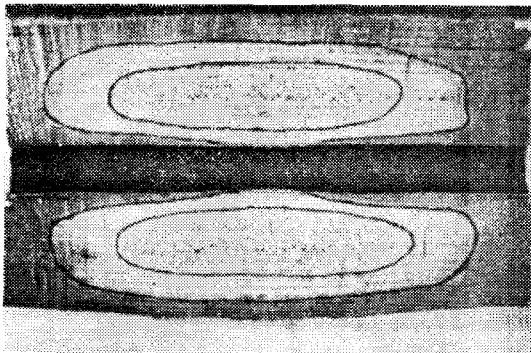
Cross-section of a partly-cured rubber roll showing how the metal spindle has allowed for some internal heating.
